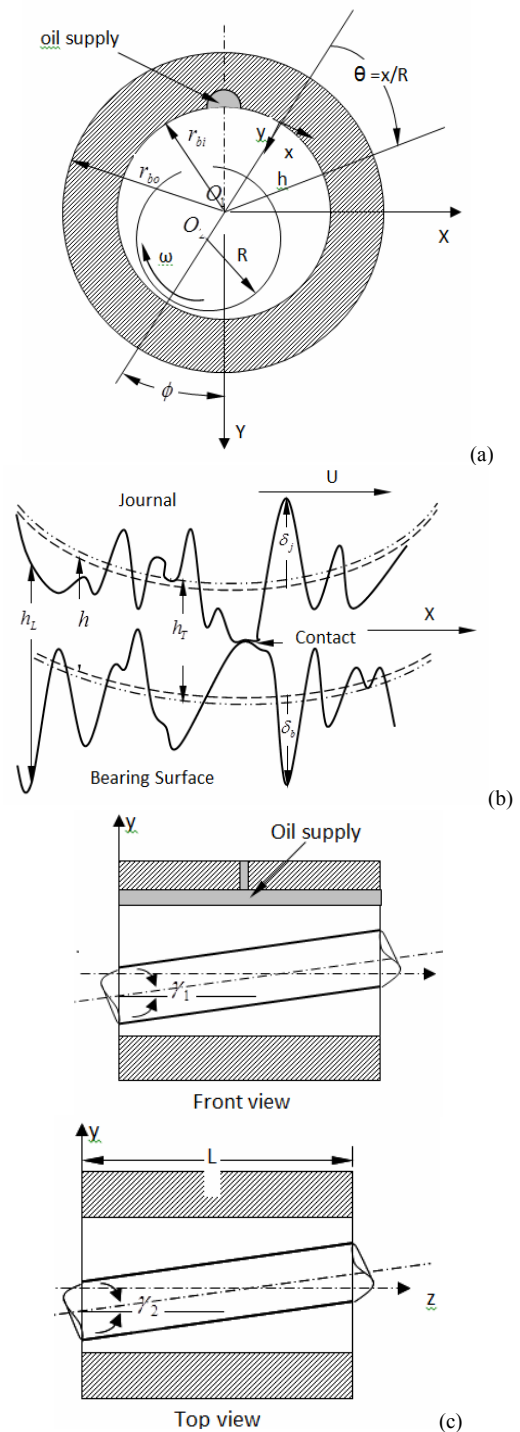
Geometrical Configuration of Grooved Misaligned Rough Journal Bearing System: (a) Journal Bearing Geometry and Coordinate System; (b) Oil Film Thickness and Surfaces Profile; (c) Bearing Misalignment.
